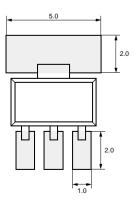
Recommended pad sizes for SOT-89B Dimensions in mm
